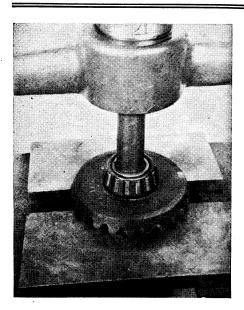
Pressing cross shaft out of bevel gear and bearing
